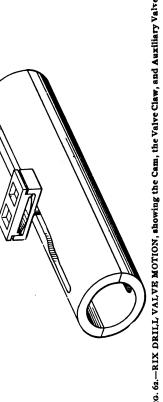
RIX DRILL VALVE MOTION, showing the Cam, the Valve Claw, and Auxiliary Valve.
